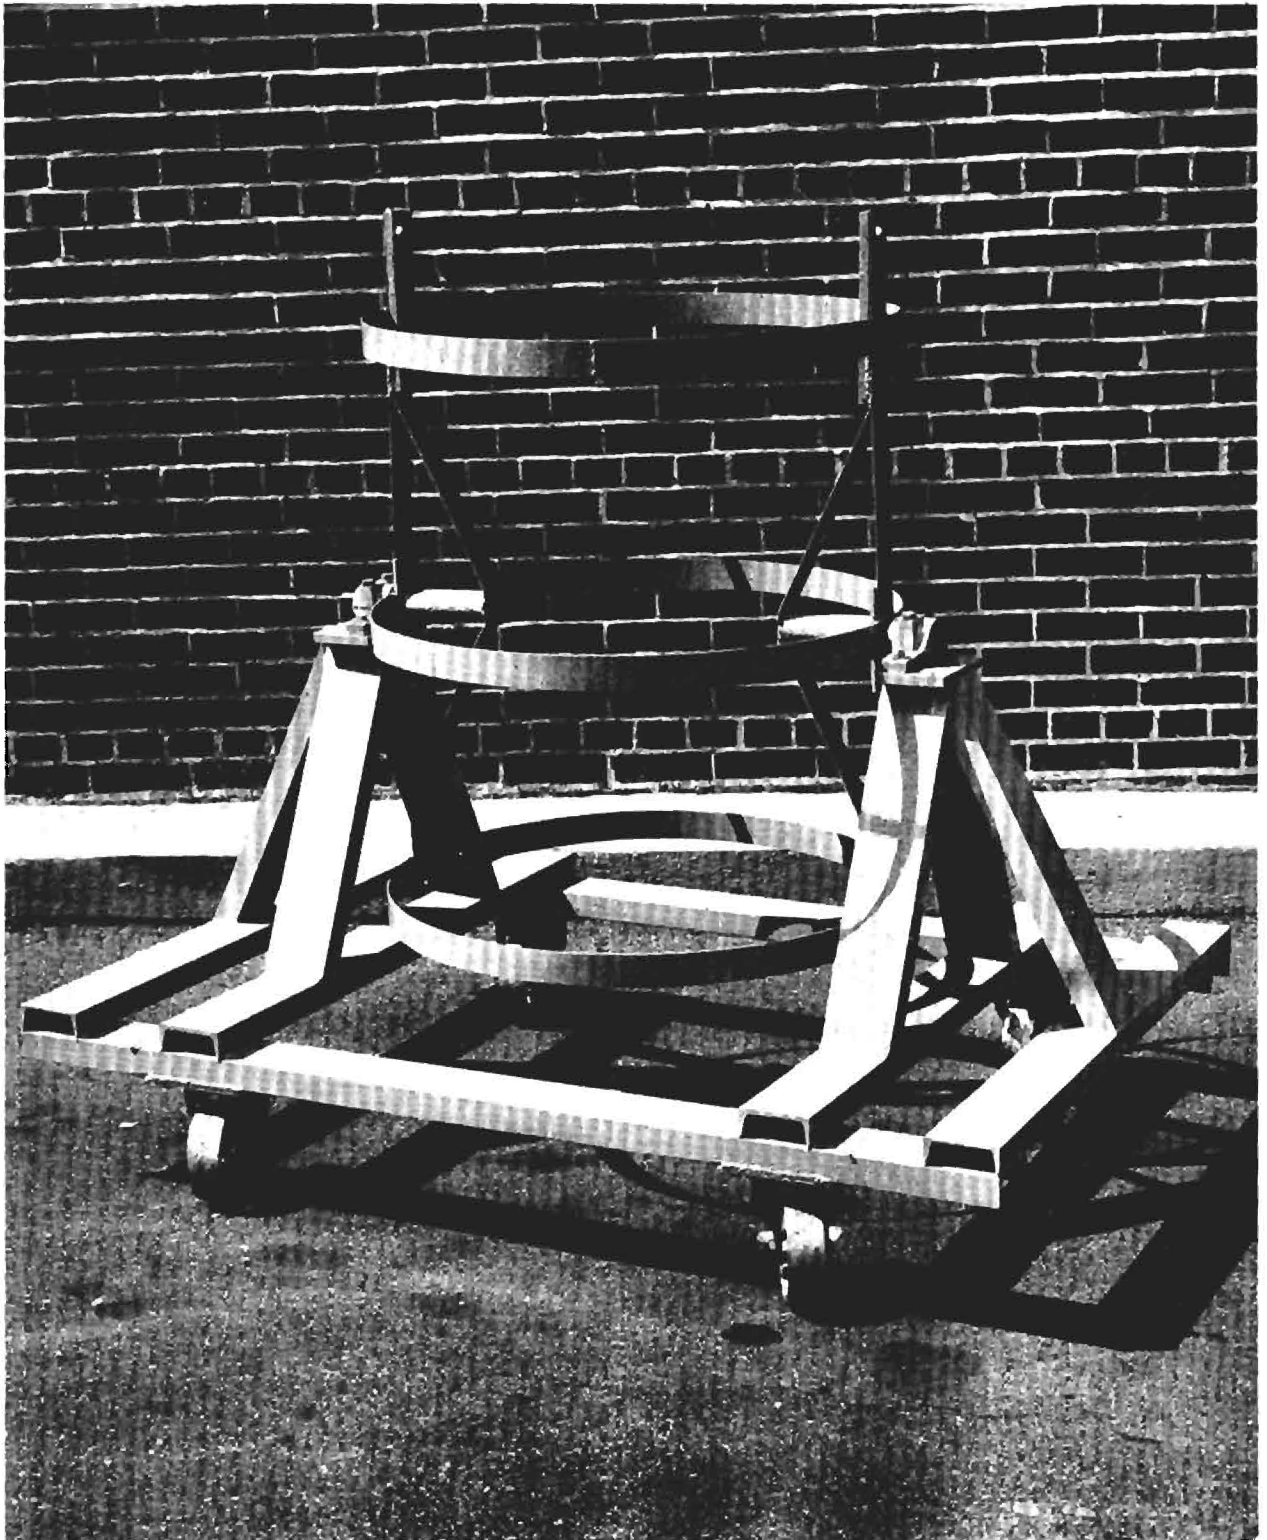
Nose Cone Mold Hoop Frame and Mold Support Dolly.
